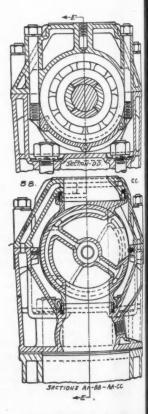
Transverse section through rotary valve rotating at one-quarter crankshaft speed
